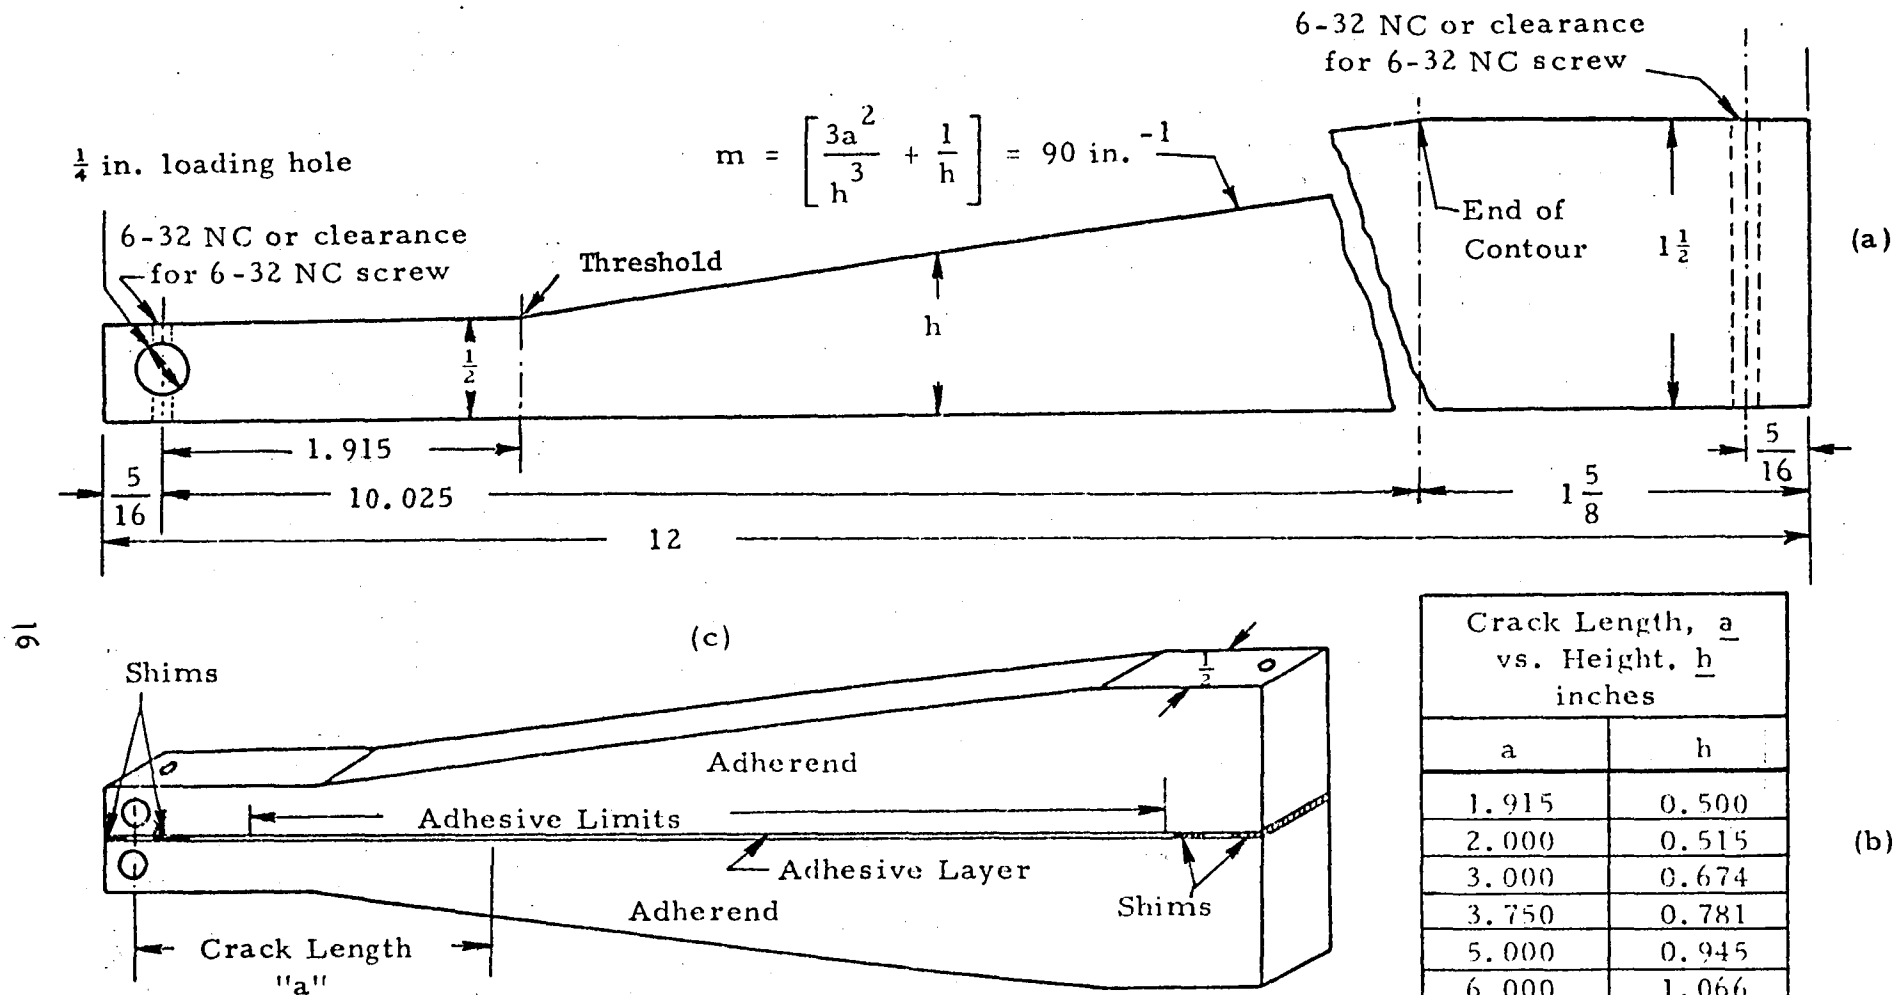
Contoured Double Cantilever Beam (CDCB) Test Specimen Drawings and Table. (a) Single Adherend with Dimensions Prior to Bonding. (b) Crack Length, a vs. Height, h , for $m = 90 \text{ in.}^{-1}$ Contour. (c) Bonded Adhesive Test Specimen.
